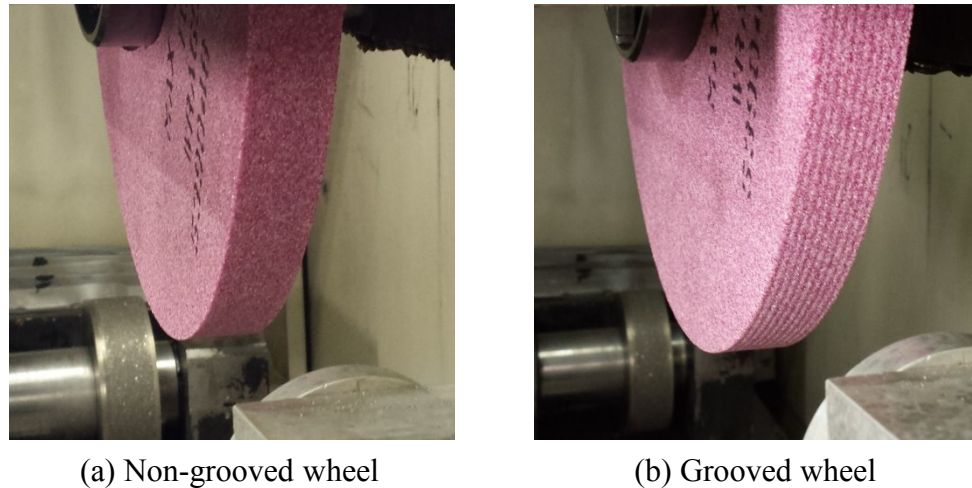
Grinding wheel surface for (a) non-grooved and (b) grooved wheels
